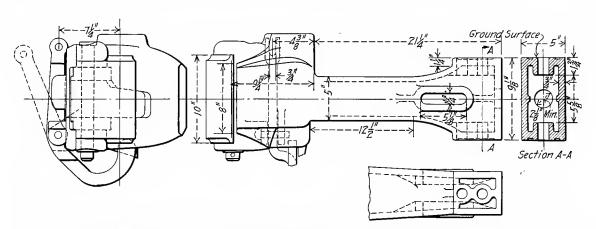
Major Bottom Operated Freight Coupler. Buckeye Steel Castings Company.
